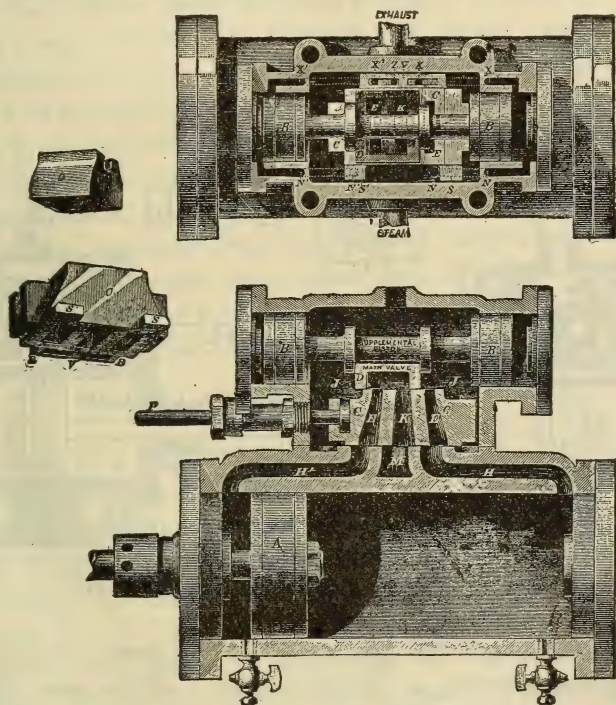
Sectional views of steam cylinder, valves, etc., of the Blake steam pump.
